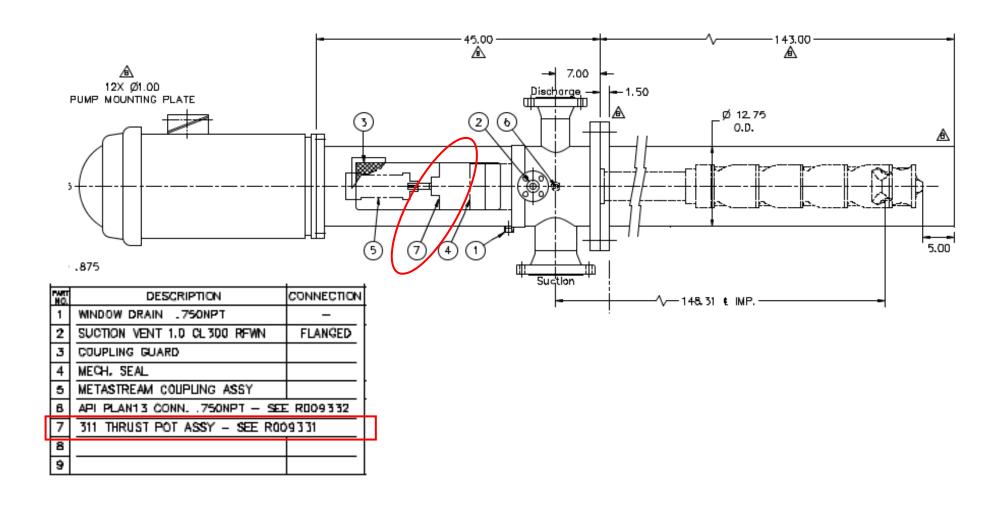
Thrust Pot Model 311 / 311 QJ Sectional Drawing
